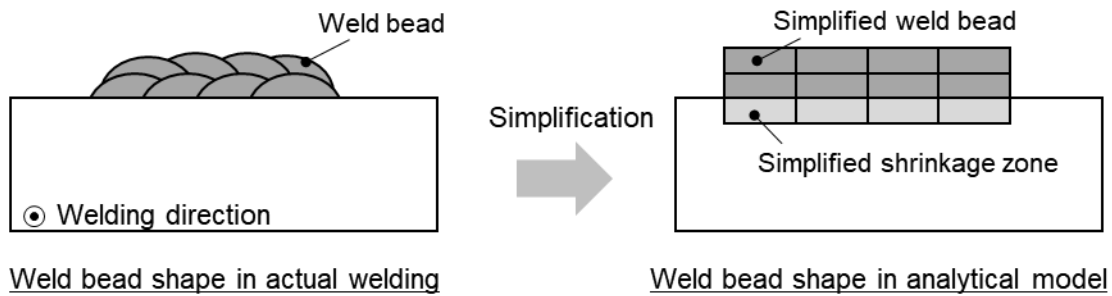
Schematic illustration of the bead shape obtained by multi-layer welding and simplification in analytical model.
